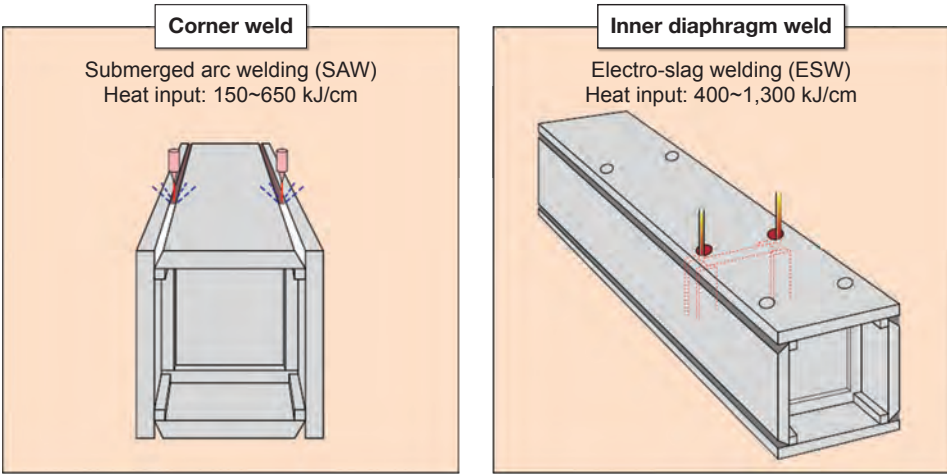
Outline of Column-Beam Connection of Box Column and Anxiety over Brittle Fracture Occurrence
